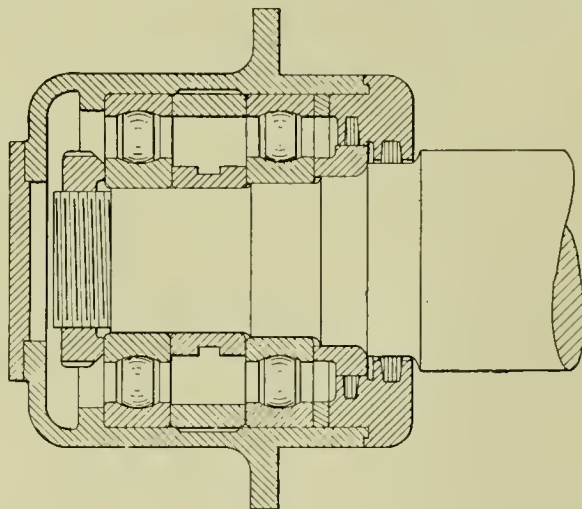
Journal Box With Disc Bearings Used On the Swedish State Railways
